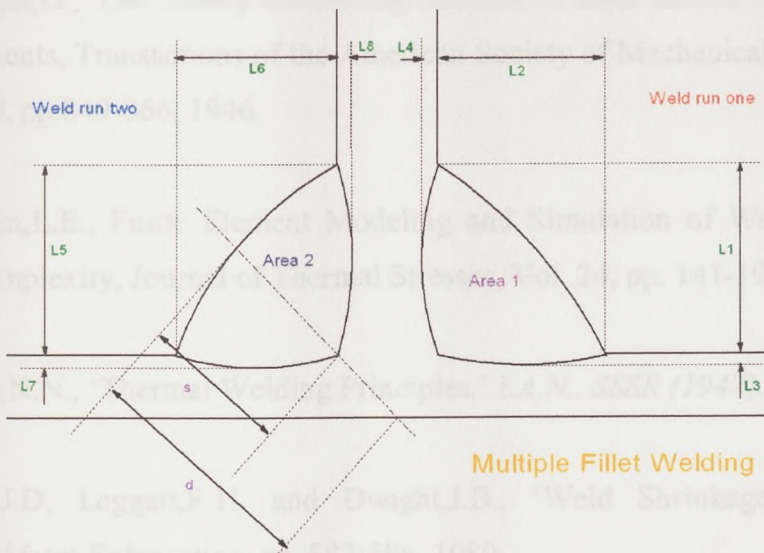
Angular distortion in double-sided fillet welds
